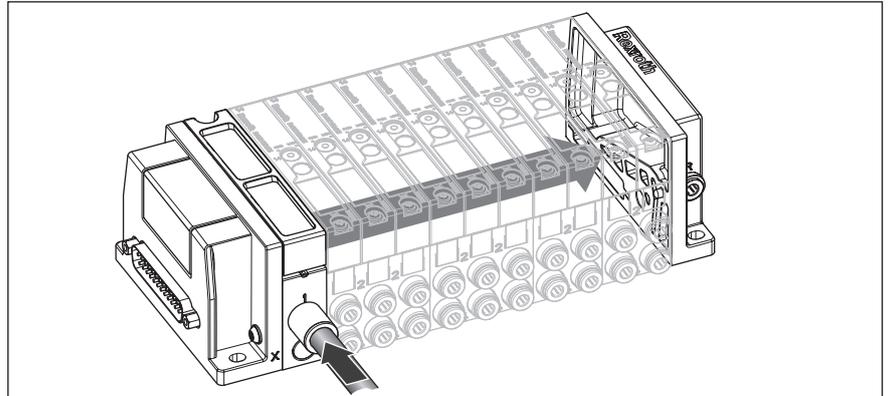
Compressed air supply via the left supply plate, example: AV03 series valve system
